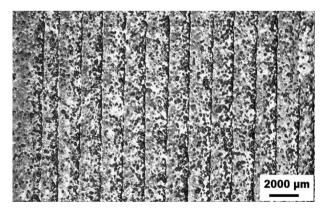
The surface of the weld cladding coating made from low hardness powder 31.10.10 with a laser step size of 1.5 mm used – no cracks
